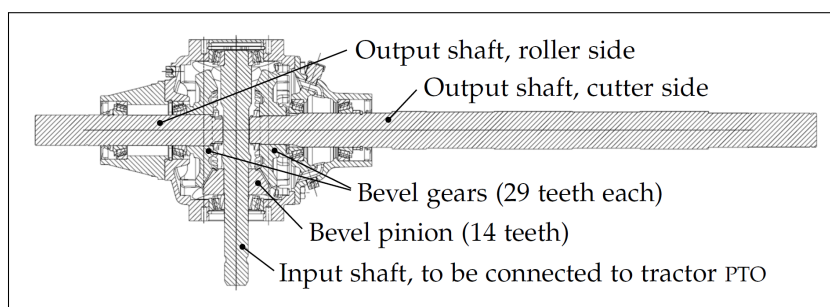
Cross-sectional view of gearbox model no. 292.218.00 manufactured by Comer Industries Spa, designed for baler applications.
